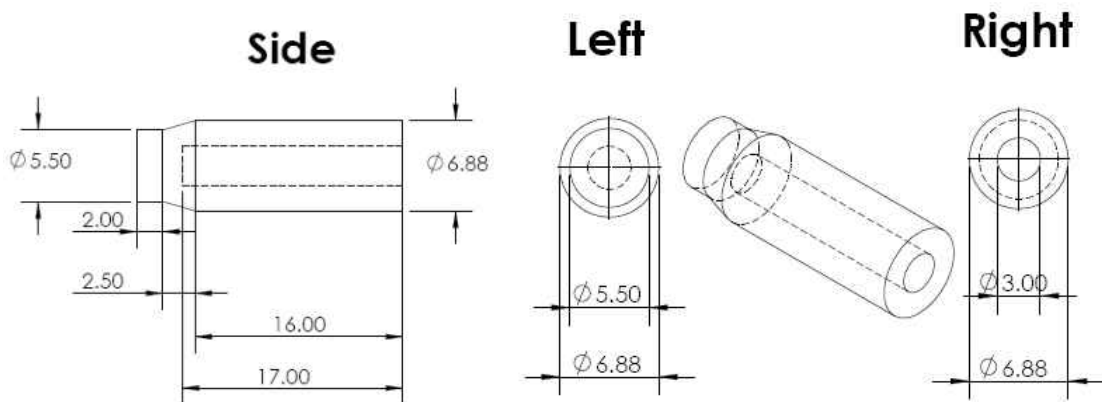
Drawing of AISI 4137 forged work piece (in.)
